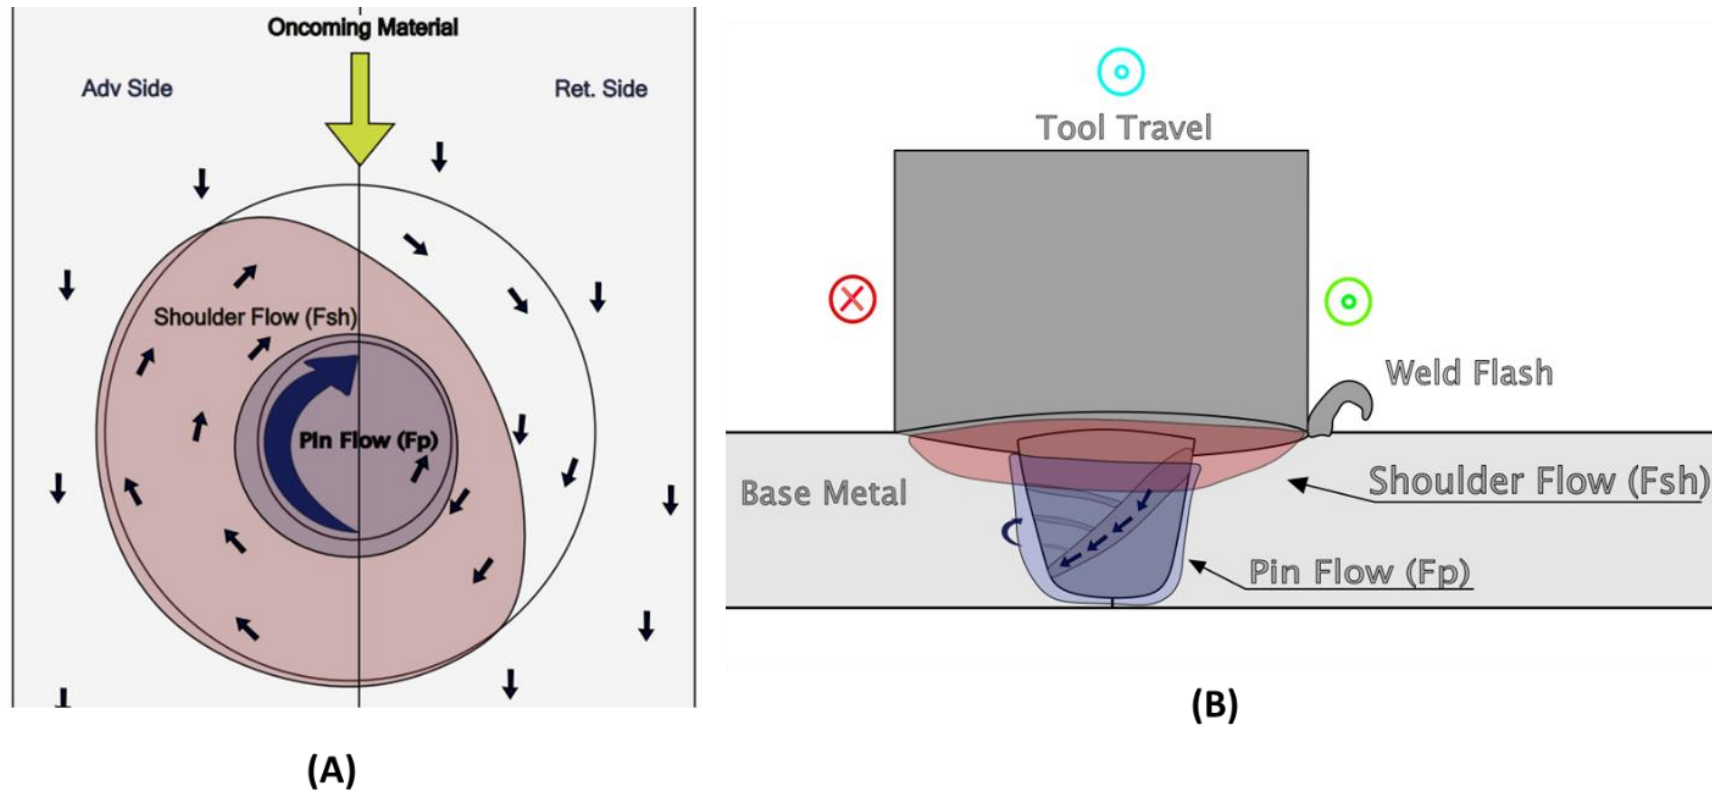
(A) Axial view of the material flow for FSW; (B) Cross-sectional view of material flow for FSW joint
